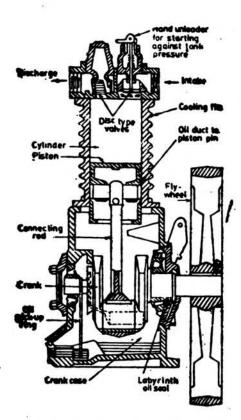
Sectional view of a singleacting air cooled, reciprocating air compressor.
